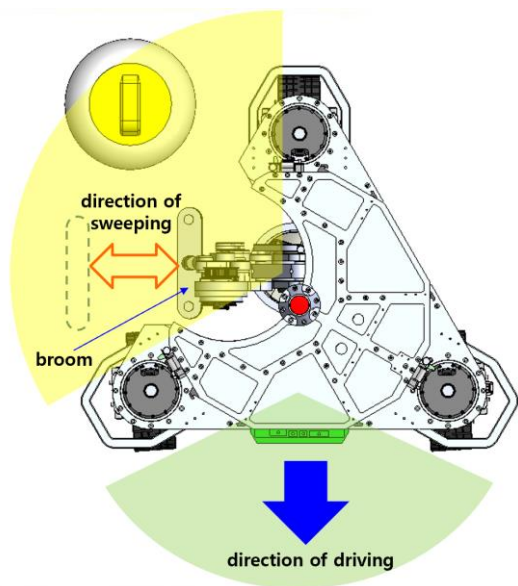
The sweeper robot having three in-wheel motors and three steering motors.
